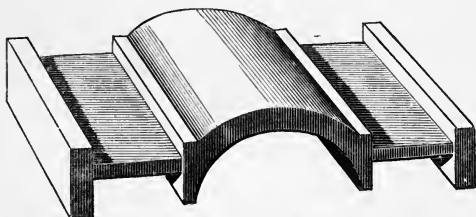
Field Magnet Casting for Shuttle-Armature Motor.
